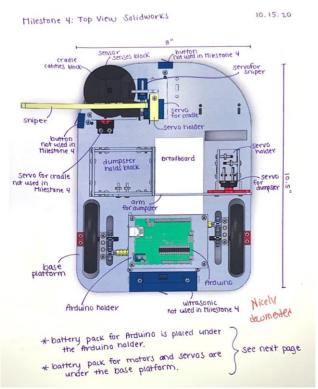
SolidWorks screenshot of Top View of robot for Milestone 4. This figure shows dimensions and labels to all components.
